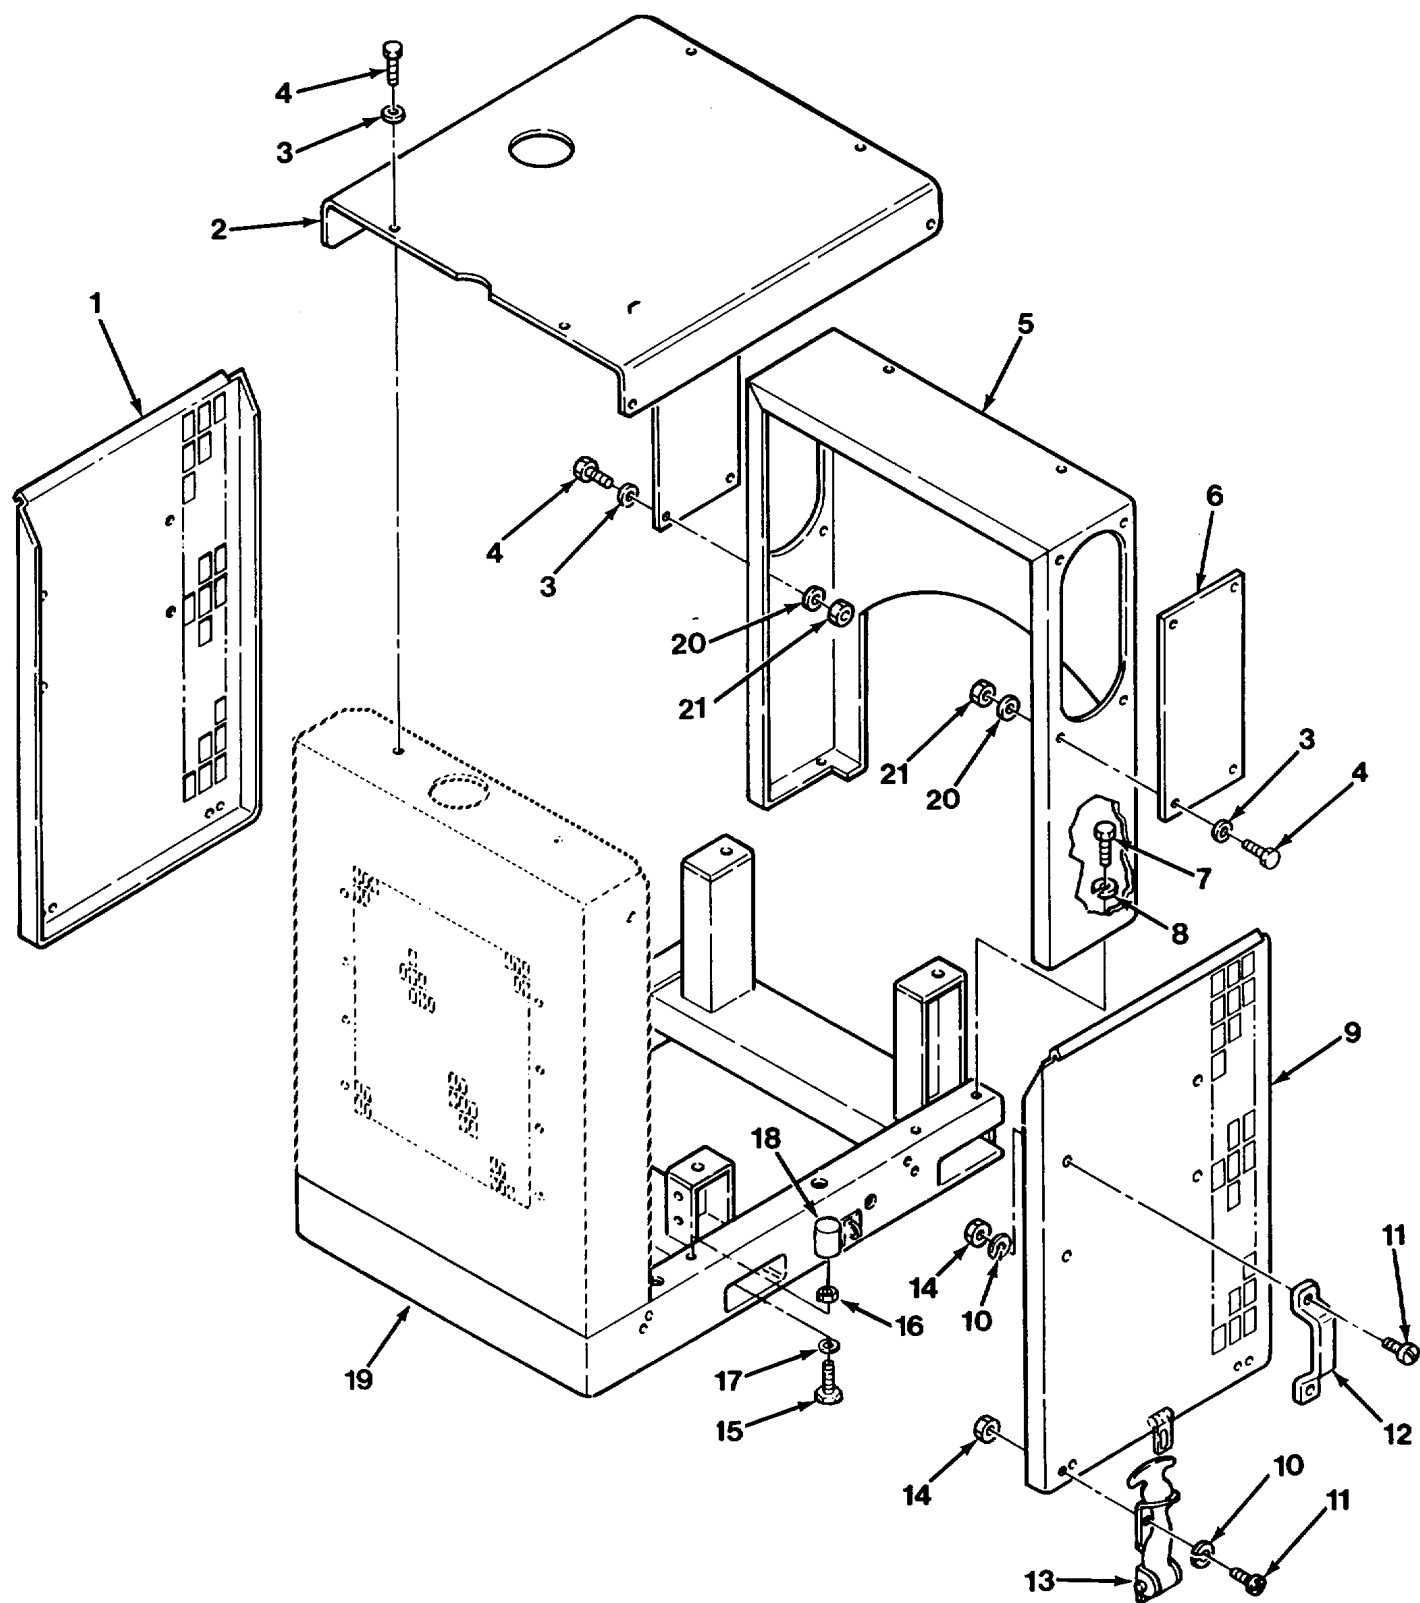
ENGINE COVER, HOOD, AND SUBBASE
